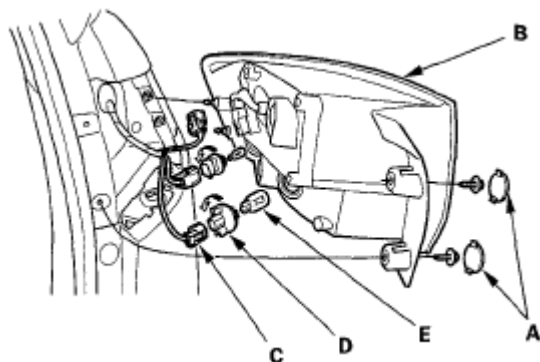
Identifying Covers, Taillight Bolts, Connector, Bulb Sockets And Bulbs
